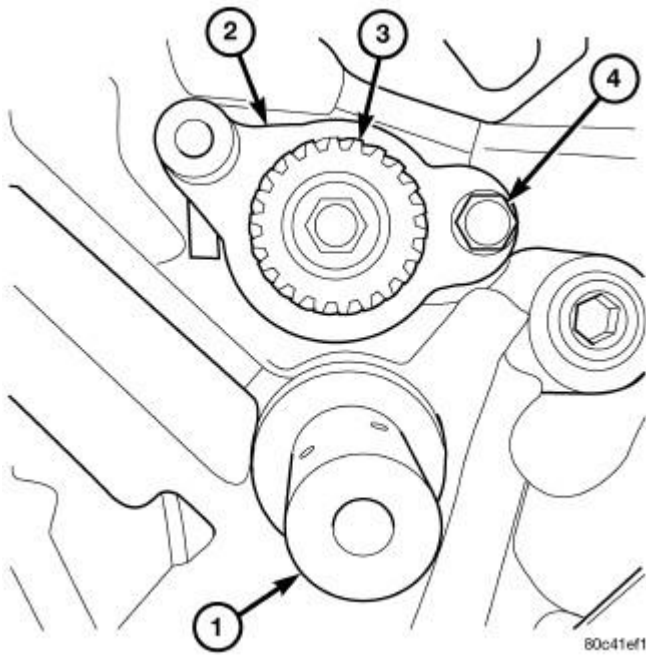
Idler Shaft, Counterbalance Shaft Thrust Plate And Drive Gear & Retaining Bolt
